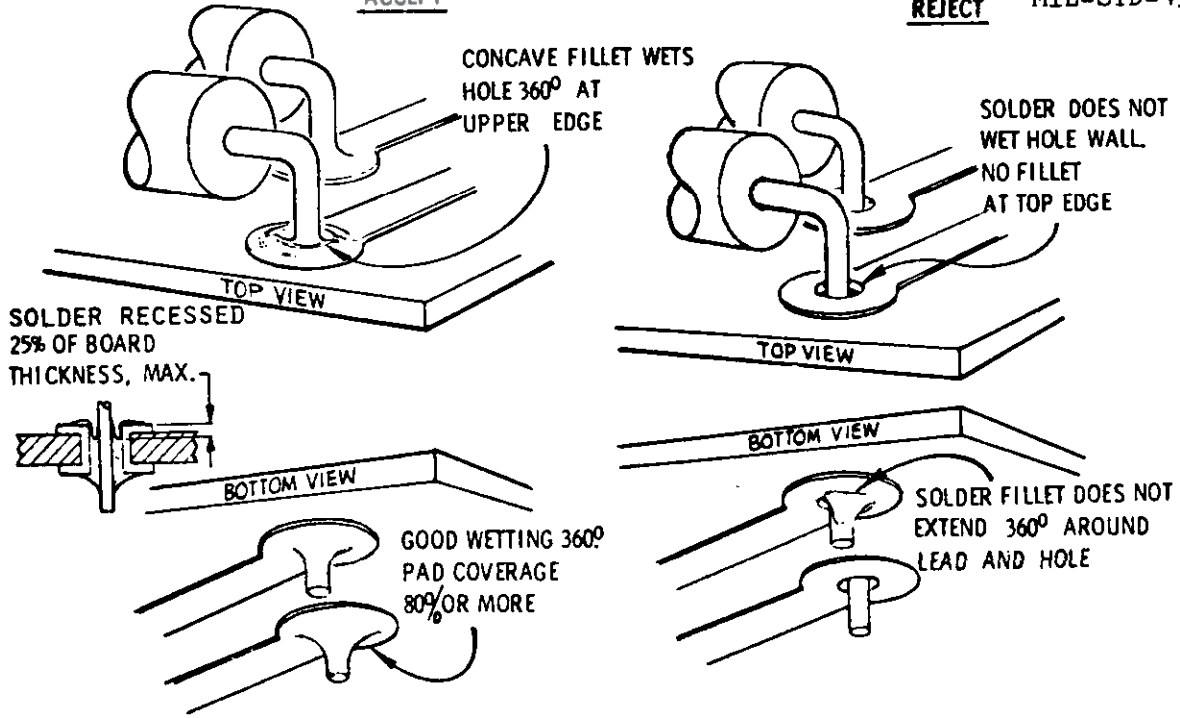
Plated-thru holes - amount of solder on joint.
